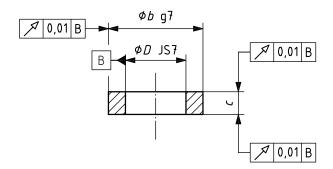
Unbalance hole dimensions for type 11 test wheels
